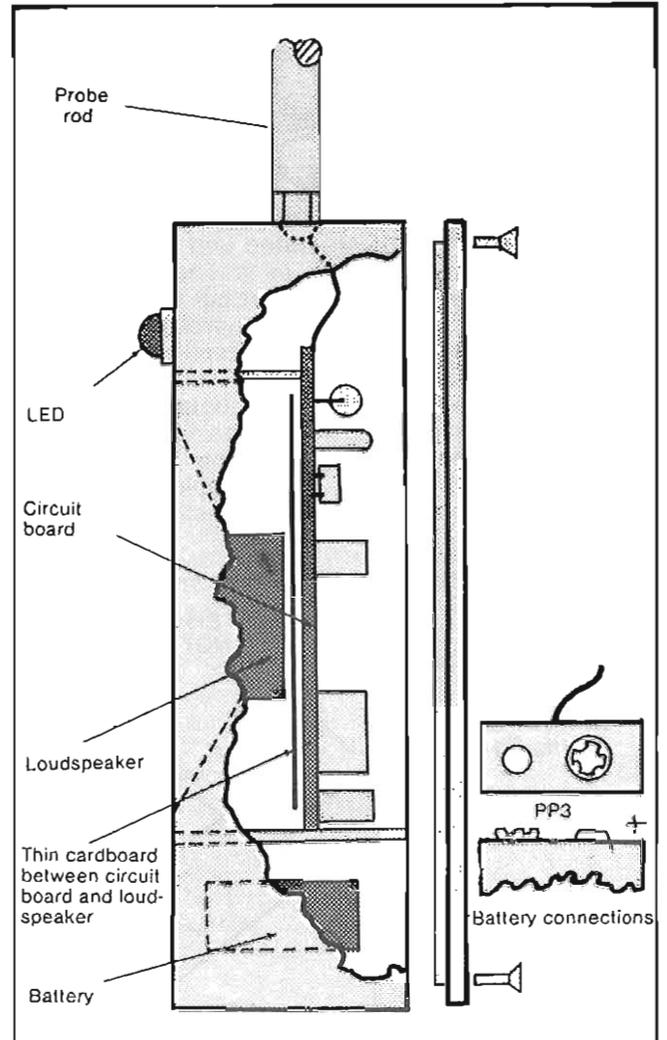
Side view of assembly. Note thin cardboard spacer between circuit board and loudspeaker body.
